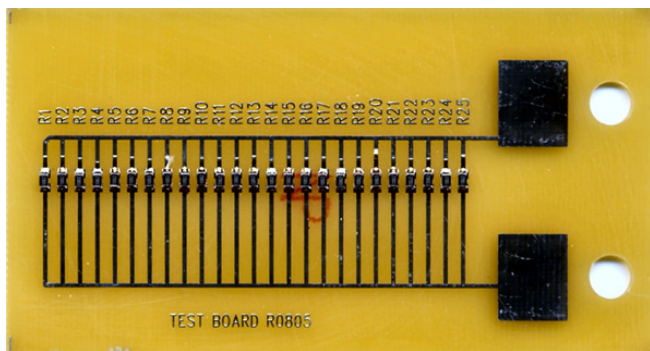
Printed circuit board showing 25 chip resistors soldered in a parallel circuit arrangement.
